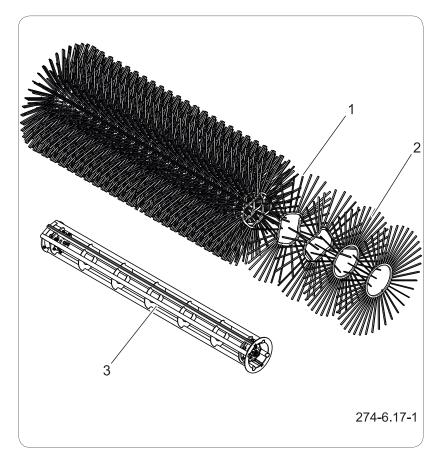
Brush design (1) (2)- segment of roller brush, (3) - brush shaft;
